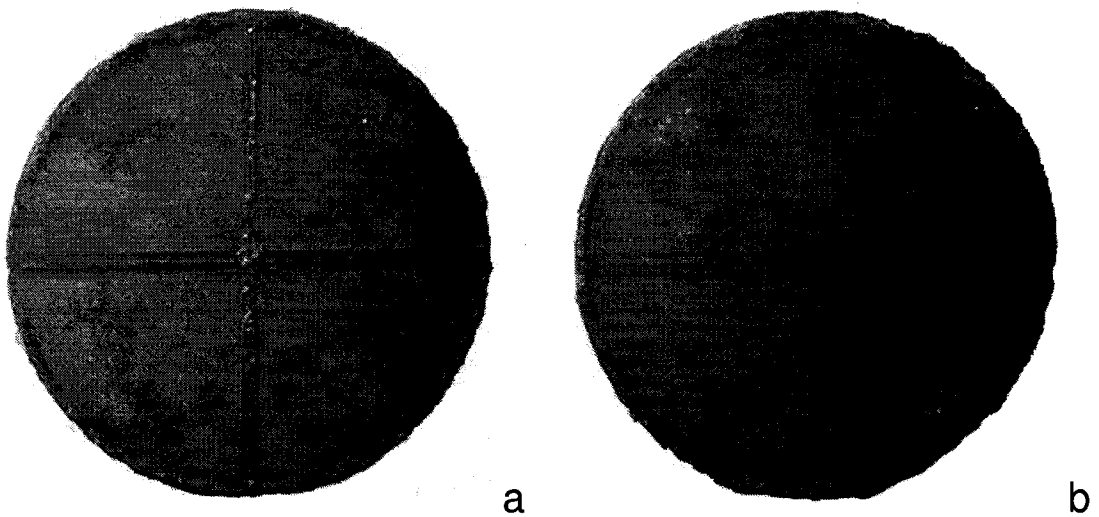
Photograph of disk 2K6R-HG molded with 6 layers of preform and 2 flow channels. Mold cavity surrounding preform filled with a ring of hot glue prior to filling.. a: top; b: bottom
